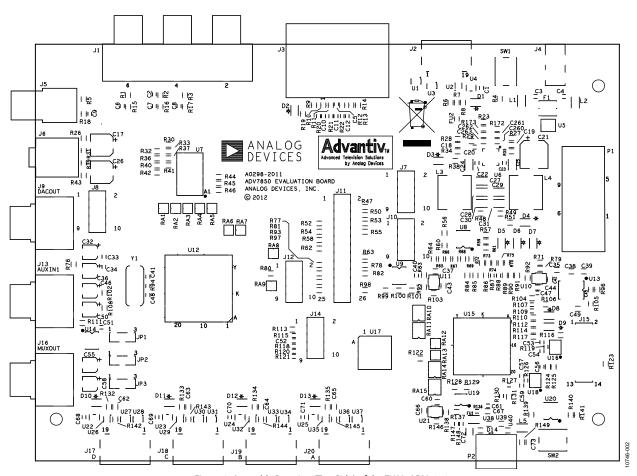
Assembly Drawing (Top Side) of the EVAL-ADV7850
